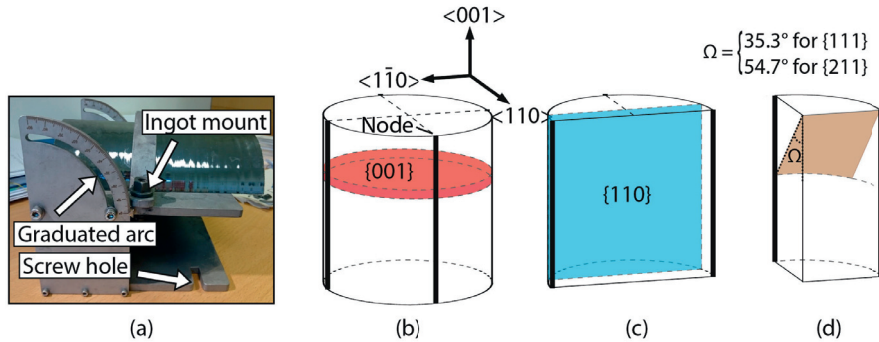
(a) The tilting table consisted of features for mounting the ingot to the table (ingot mount) and the table to the saw (screw holes), and a graduated arc for tilting. The (b) $\{001\}$ and (c) $\{110\}$ planes can be cut perpendicular and parallel to the longitudinal axis of the CZ ingot, respectively. (d) The $\{111\}$ and $\{211\}$ planes can be cut by tilting the ingot 54.7° and 35.3° , respectively.
